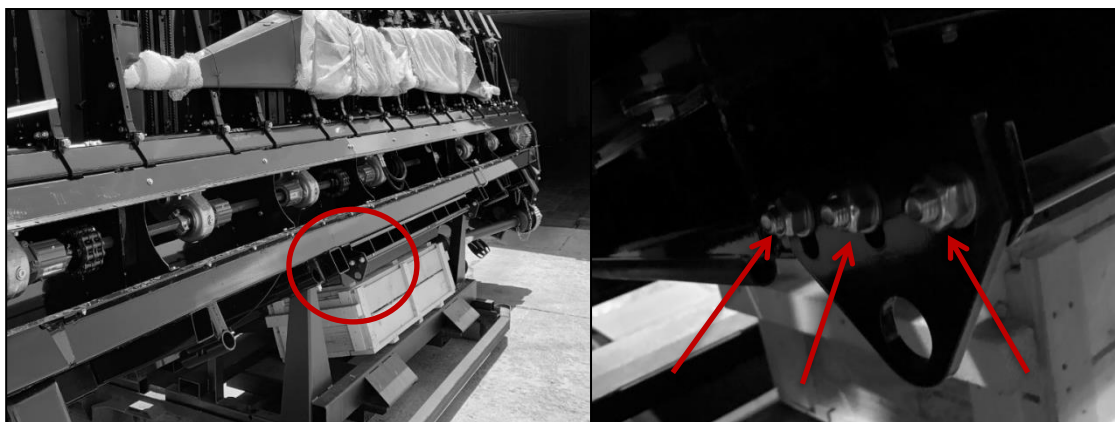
John Deere header latch (left), and latch adjustment hardware (right).
